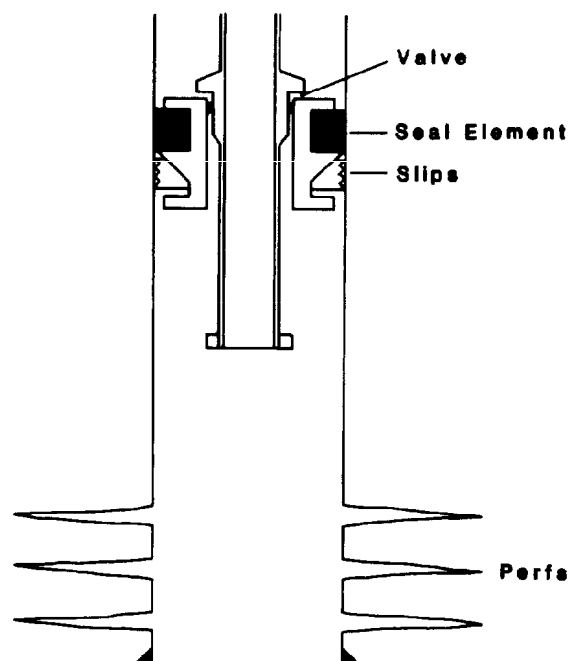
Control-head compression packer employs a top equalizing valve.
